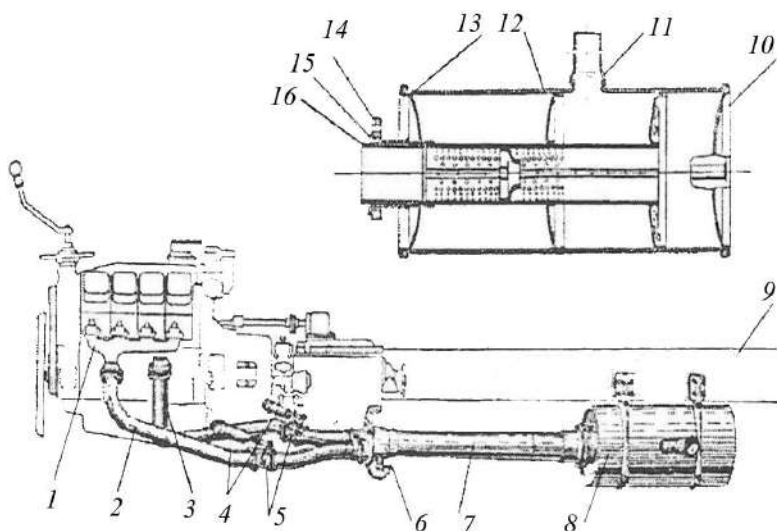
Exhaust system silencer: 1- engine; 2- left receiving pipe; 3- right intake pipe; 4- pneumatic cylinders
